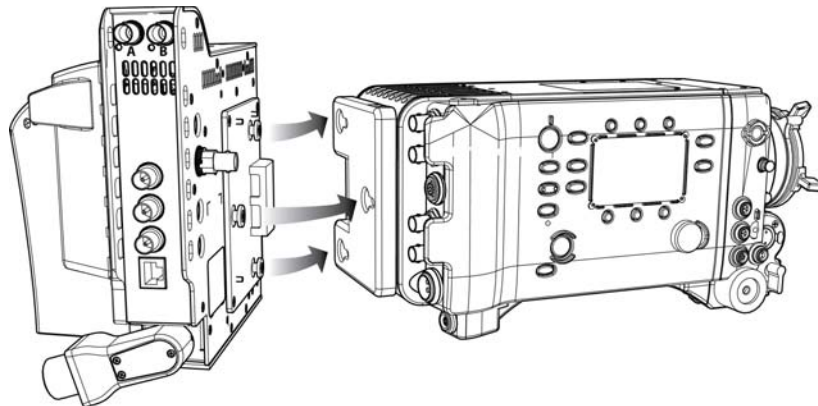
Mounting the CopperHead 3430AP Camera Unit to the Camera
